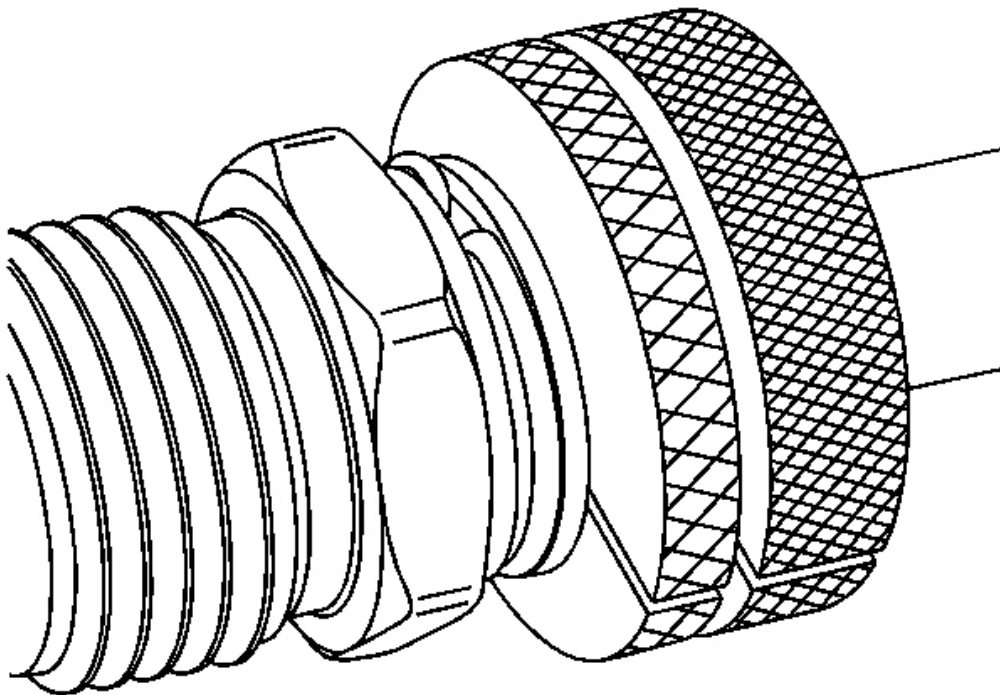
Installing J 41623-B Onto Generator Cooling Inlet Pipe
